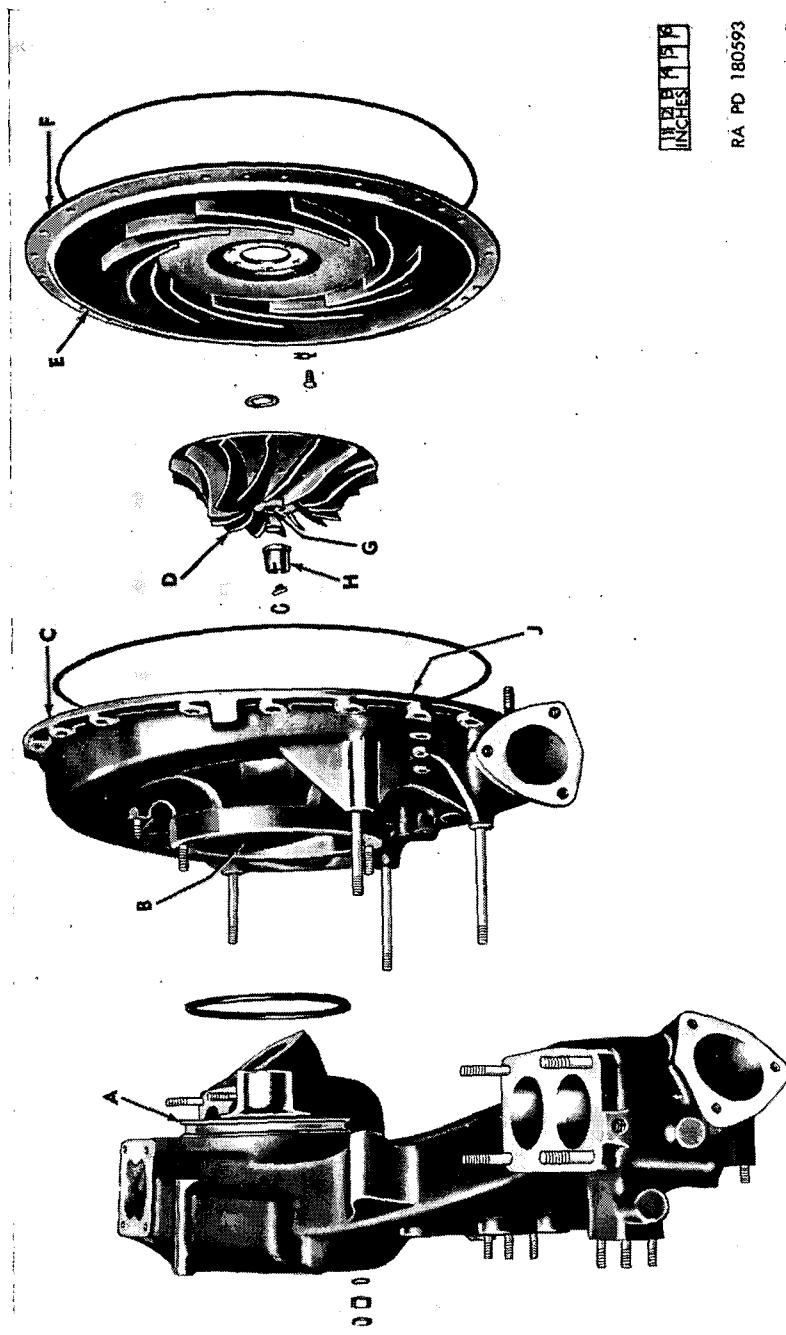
Repair and rebuild standard points of measurement for supercharger impeller, diffuser and housing.
